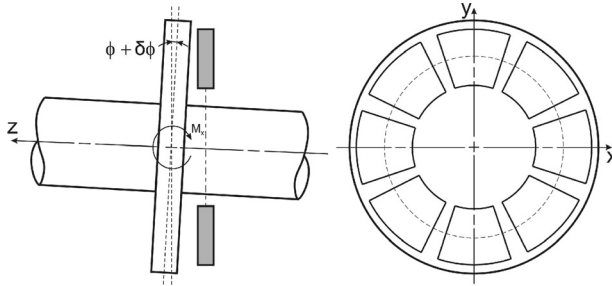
Sketch of tilting motion of the rotor of a sector pad thrust bearing
